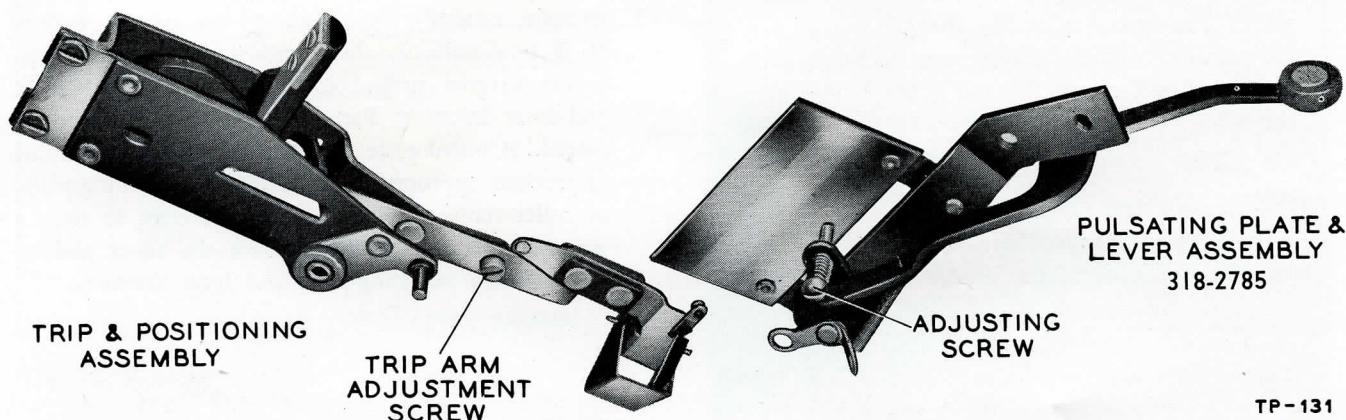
TRIP AND POSITIONING — PULSATING-PLATE AND LEVER ASSEMBLIES
